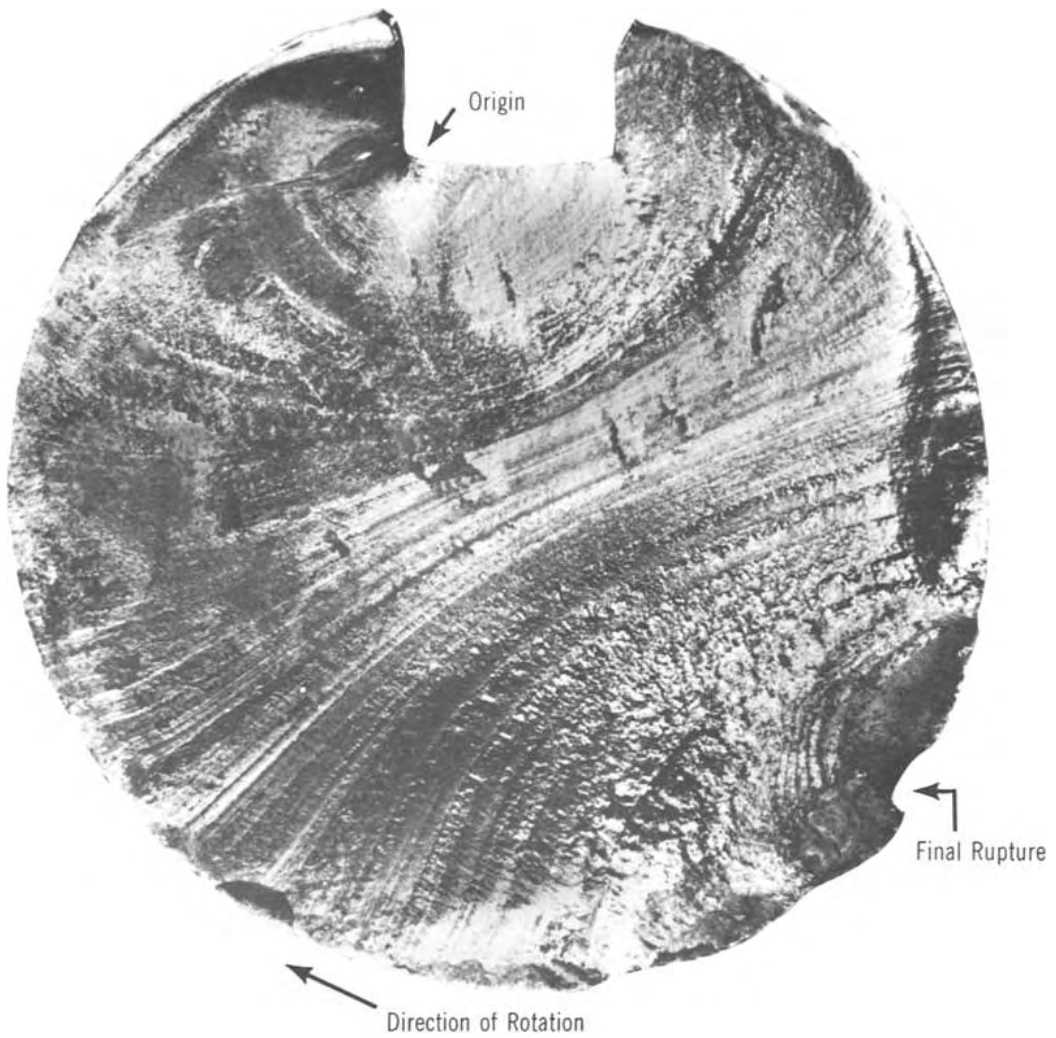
Rotating bending fatigue fracture of a keyed shaft of 1040 steel, approximately 30 HRC. The fatigue crack originated at the lower left corner of the keyway and extended almost through the entire cross section before final rupture occurred. A prominent beachmark pattern is visible, appearing to swing counterclockwise on this section because the rotation was in a clockwise direction.
